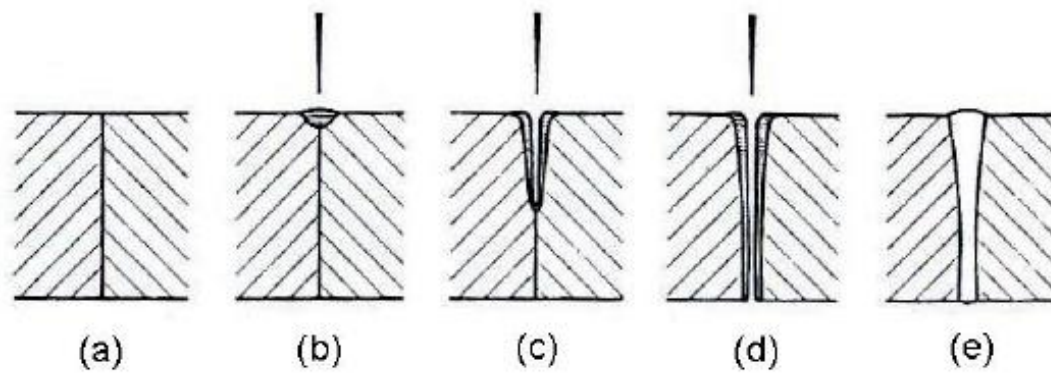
Schematic illustration of different stages in butt welding in keyhole mode (a) initial stage, (b) start of melting, (c) start of keyhole formation, (d) full penetrated keyhole and (e) solidified weld profile [63]
